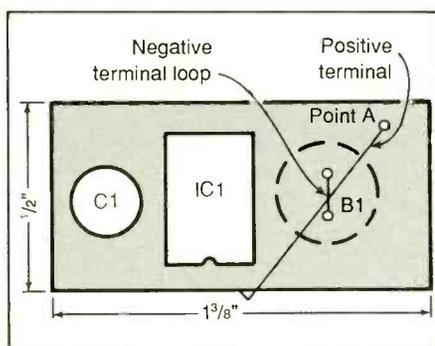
Assembly details for project, which mounts on and is wired to a small perforated board.
